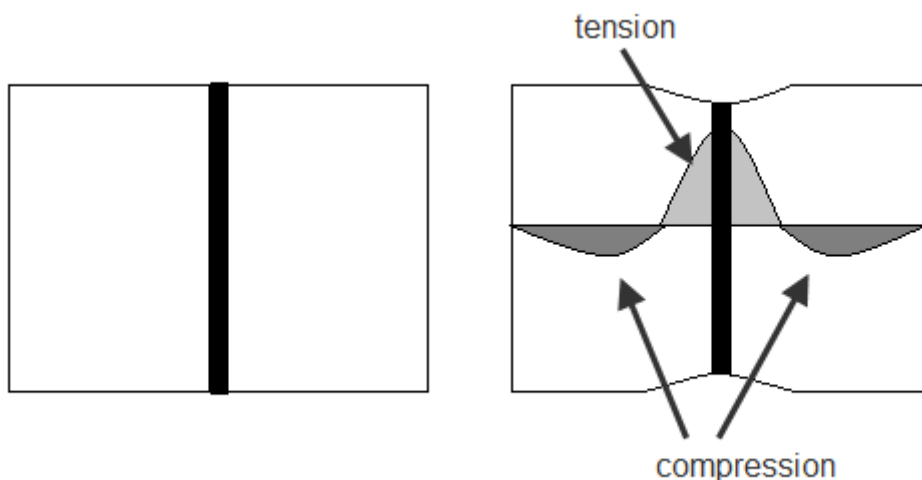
Compression and tension stress because of weld bead shrinkage
